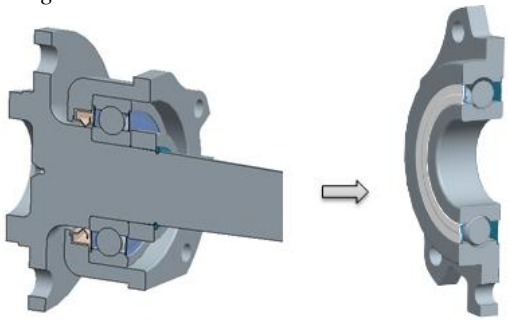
Integrated design for Semi-floating axle wheel-end bearing
